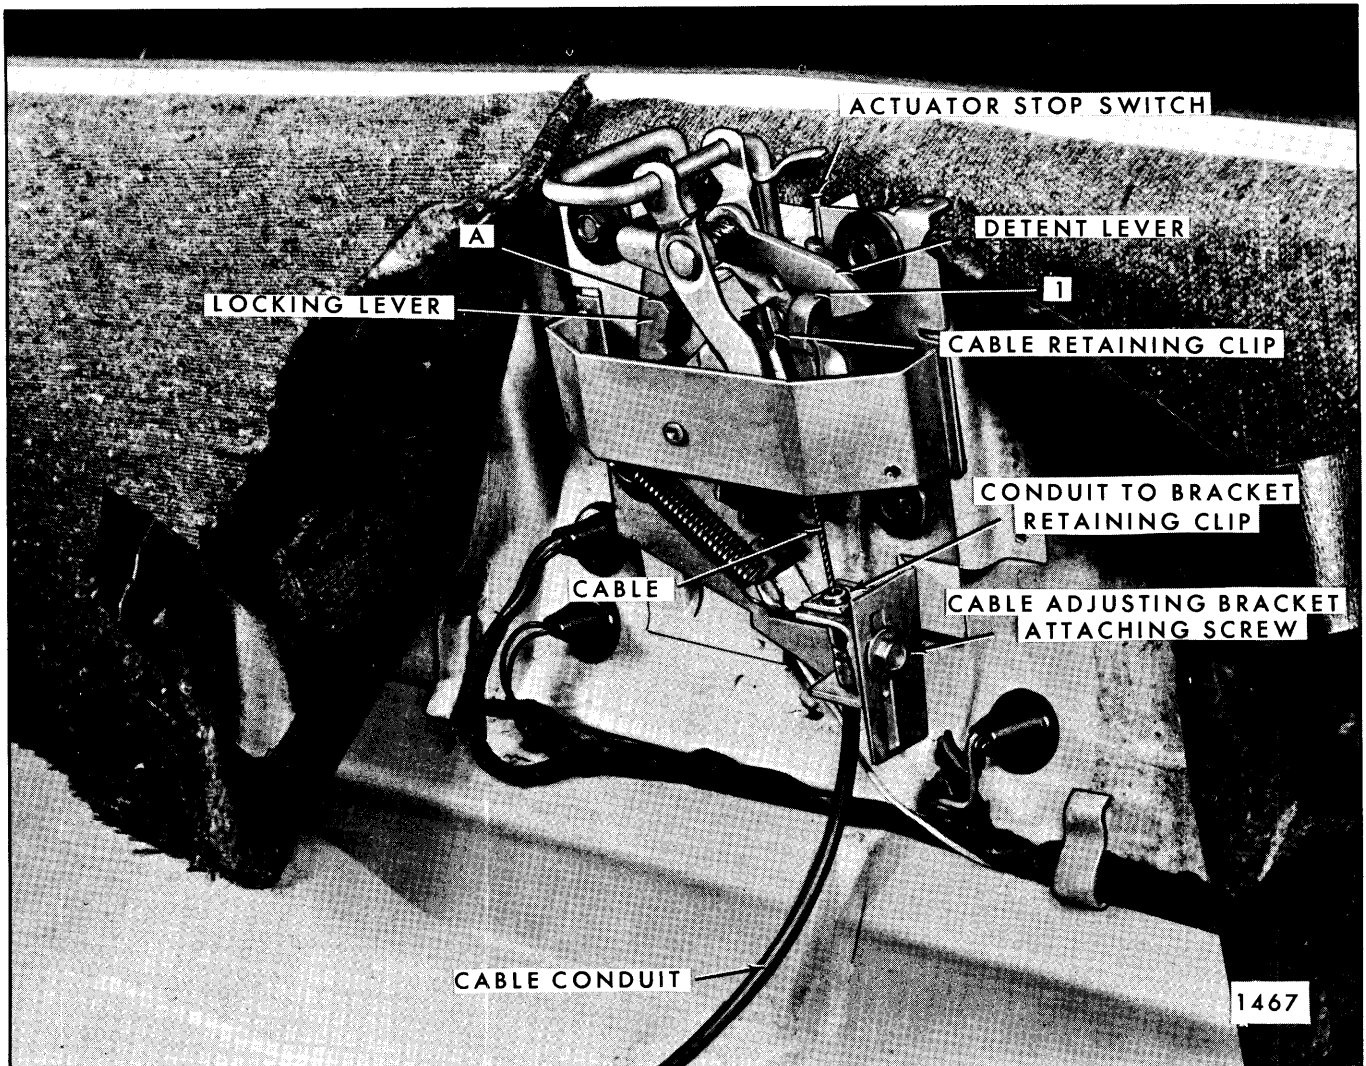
Rear Compartment Mechanical Pull-Down Unit - Cadillac Styles with Option
